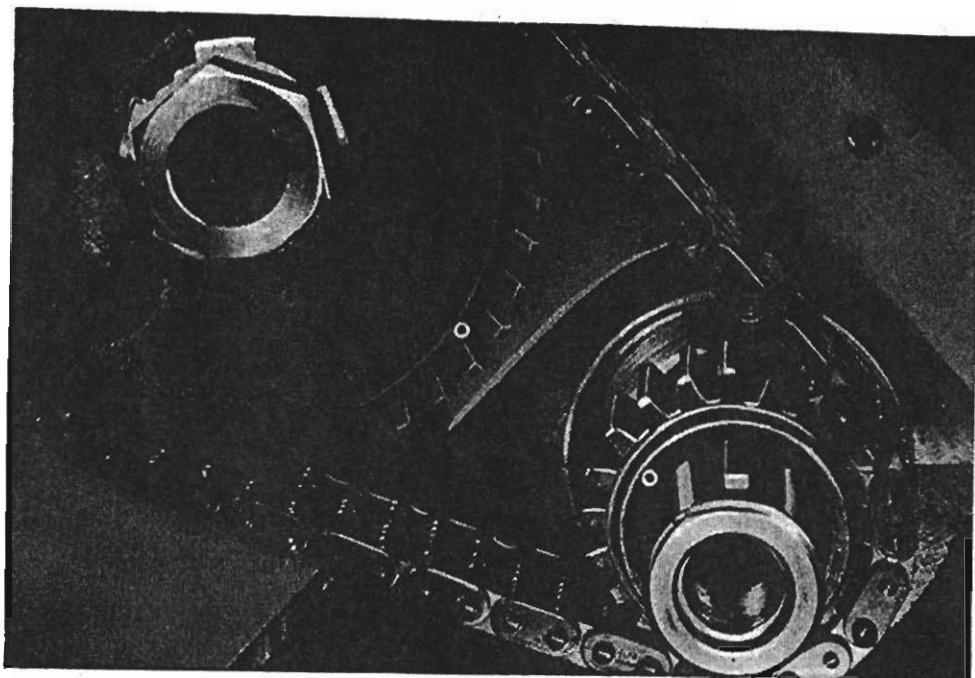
Crankshaft Sprocket and Camshaft Sprocket Are Properly Related When the "O" Marks Are in Position Shown.
